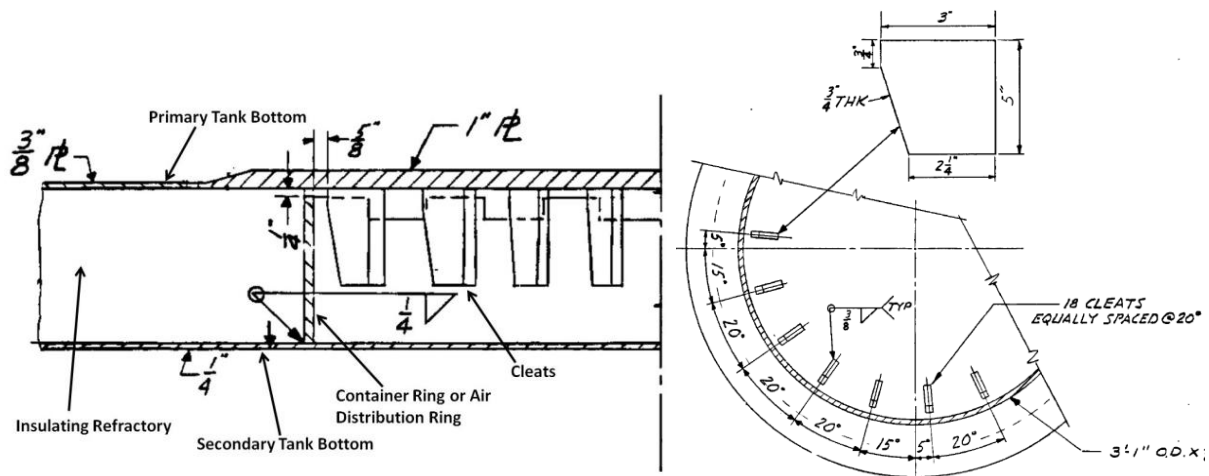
Primary Tank Bottom Cleats Engaged in Container Ring
